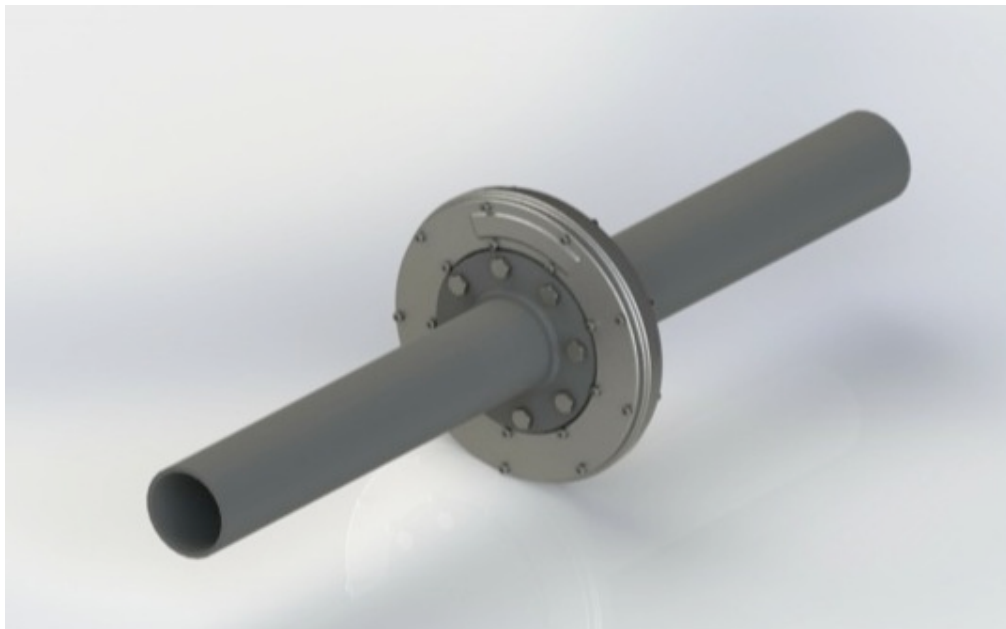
Voltage isolation sensorSEAL™ installed in a flanged fitting.
